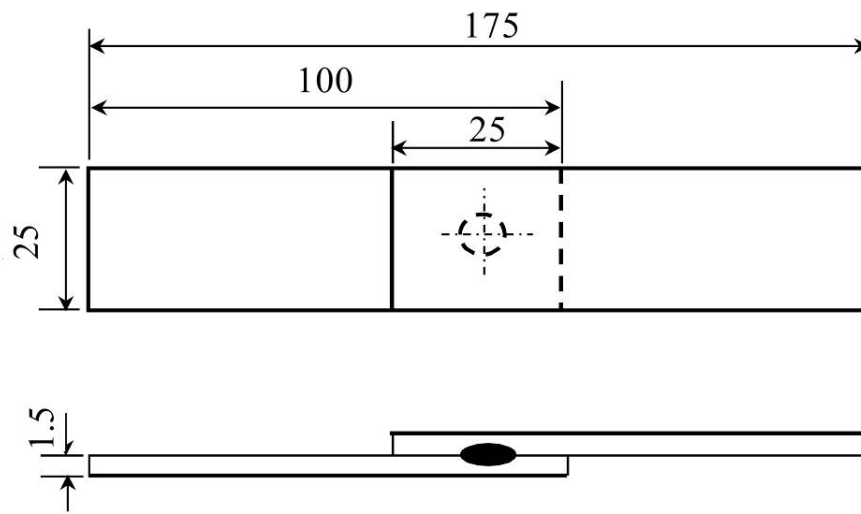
Geometries of resistance spot welding specimens (mm).
